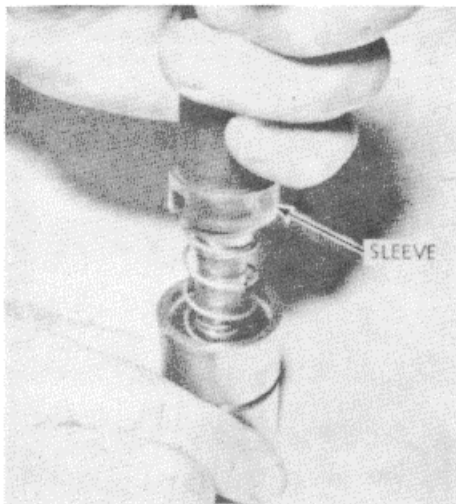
Disassembly/cleaning/assembly - breech scavenger check valve (1 of 2).
